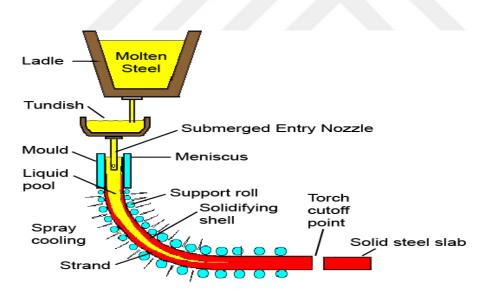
Schematic lay-out of the ladle, tundish, SEN and casting mould for curved continuous casting [4].
